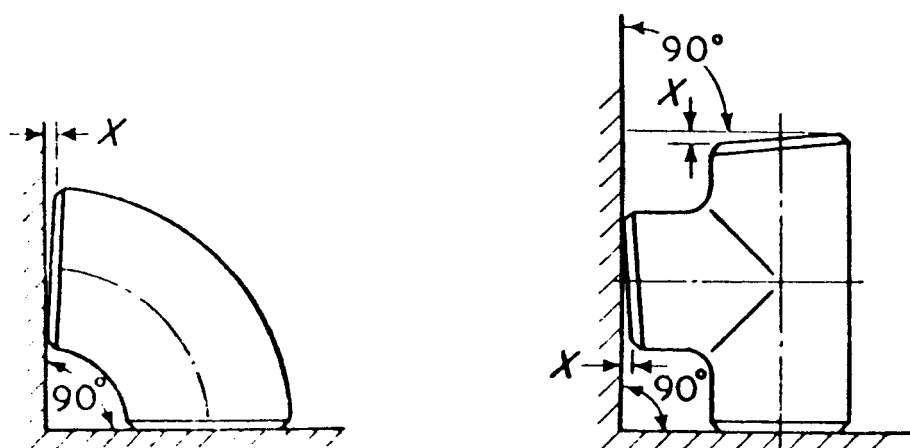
Typical examples of off-square tolerance “X” checked against reference planes
